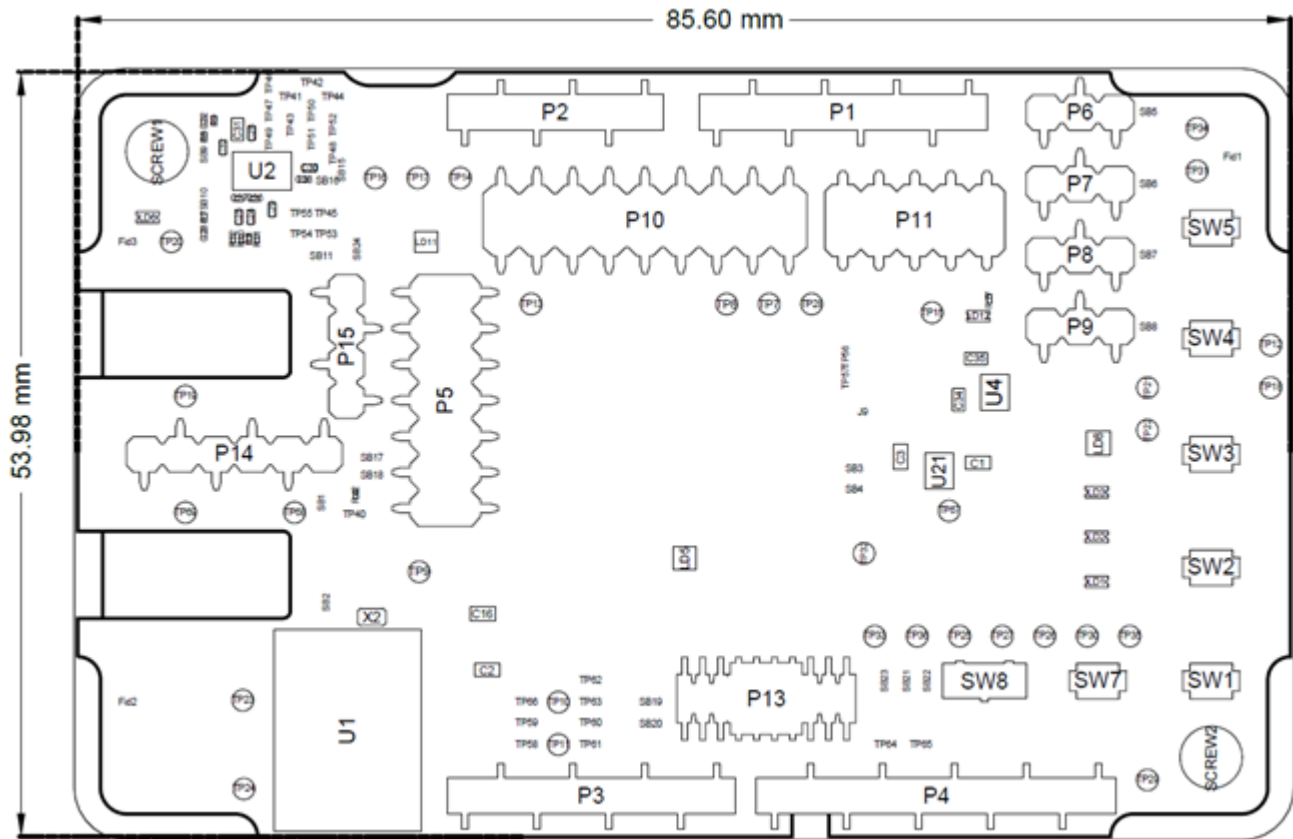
Physical dimensions of the C212-NORA-B126 LE Audio board
